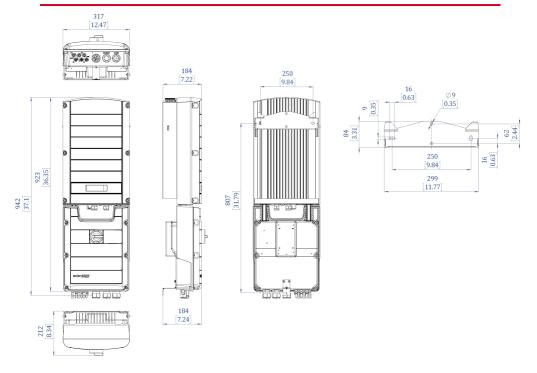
Inverter dimensions - StorEdge Connection Unit with glands
